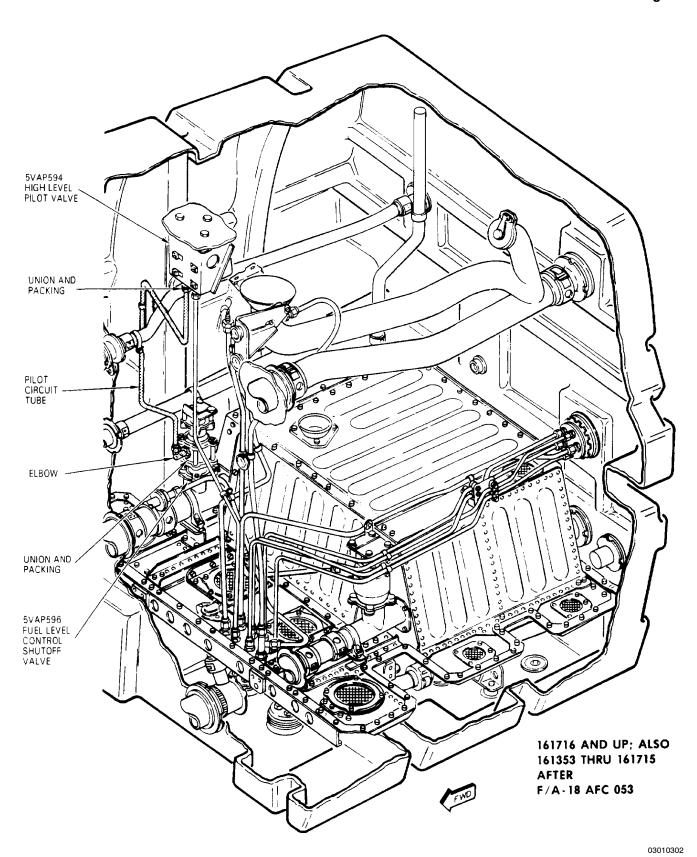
No. 2 Fuel Tank Troubleshooting Component Locator (Sheet 2)
